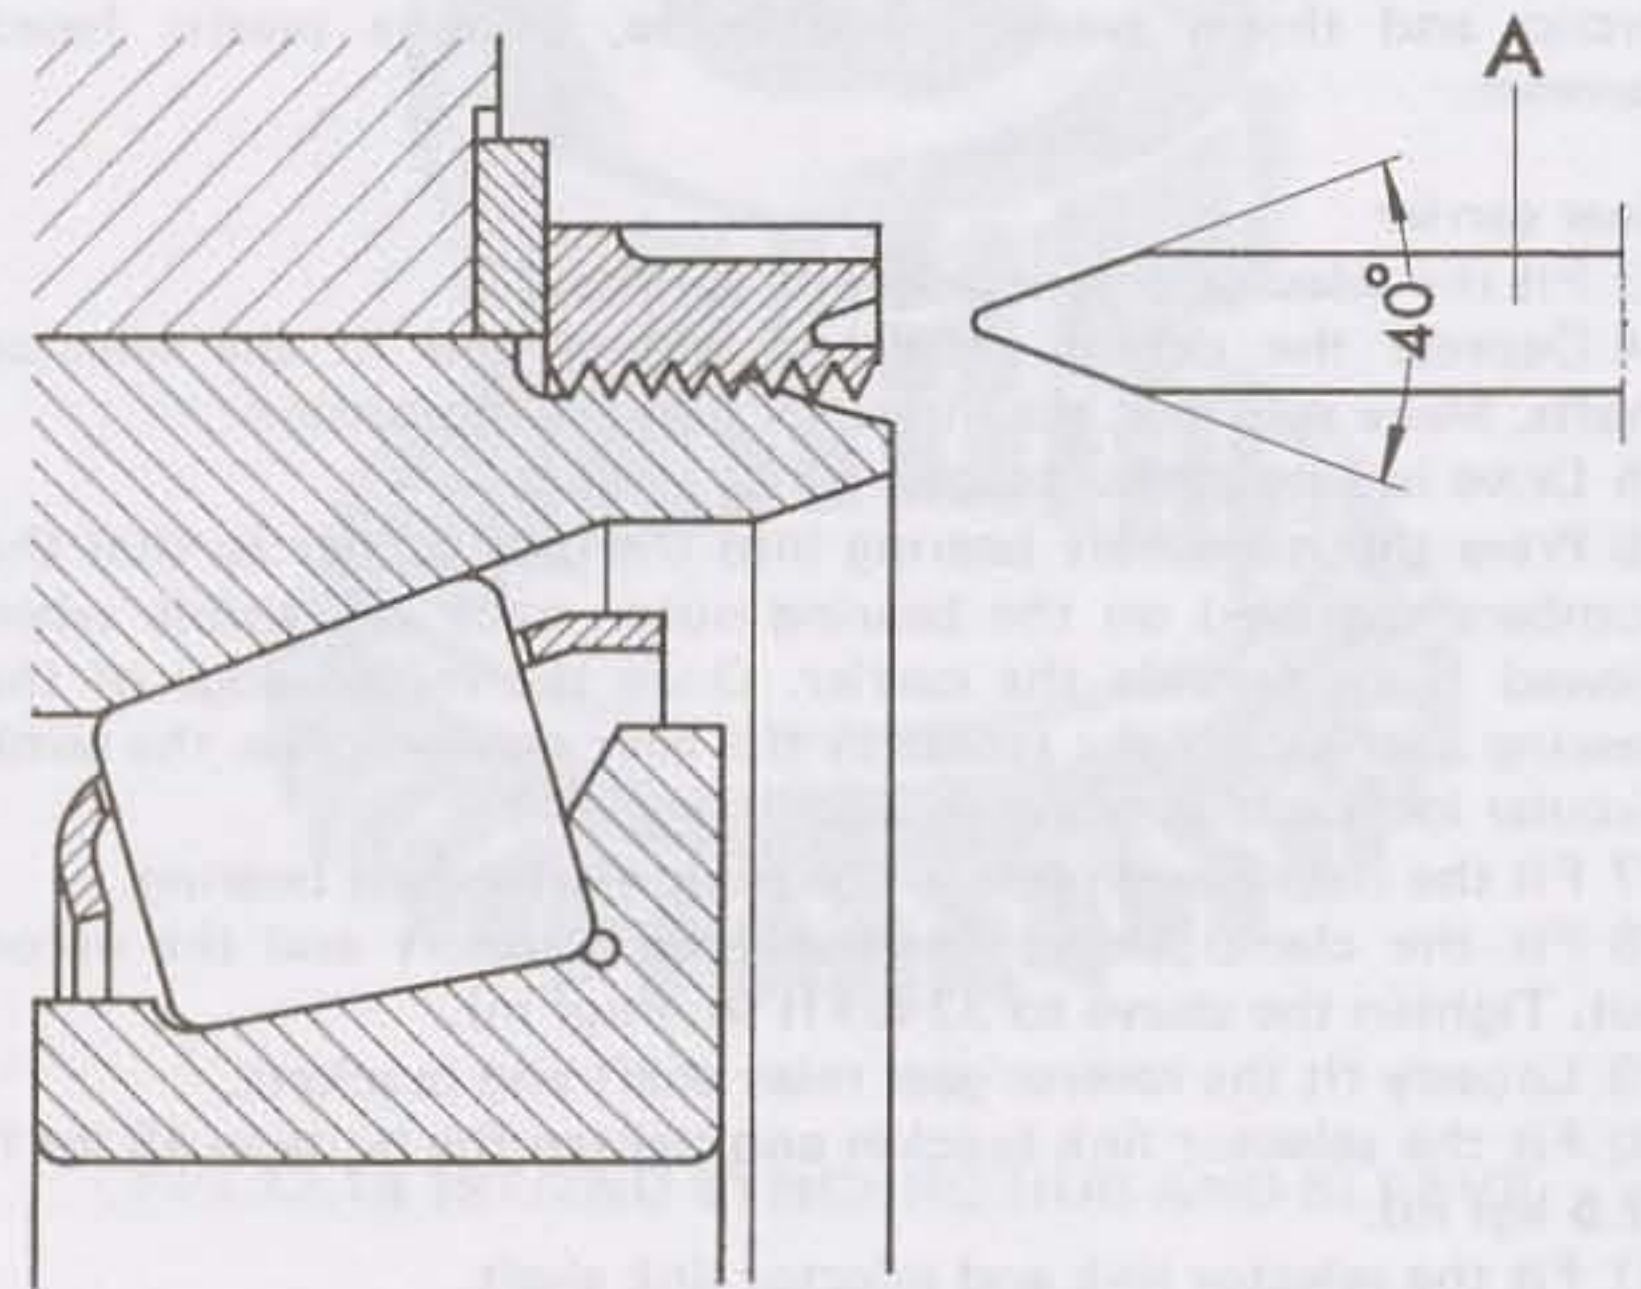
PINION DRIVESHAFT NUT STAKING DIAGRAM
